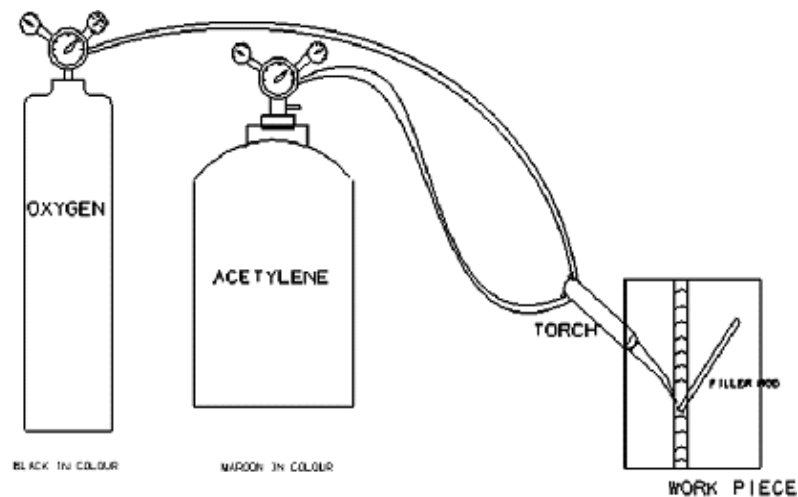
Oxy-Acetylene Welding (Gas Welding)
